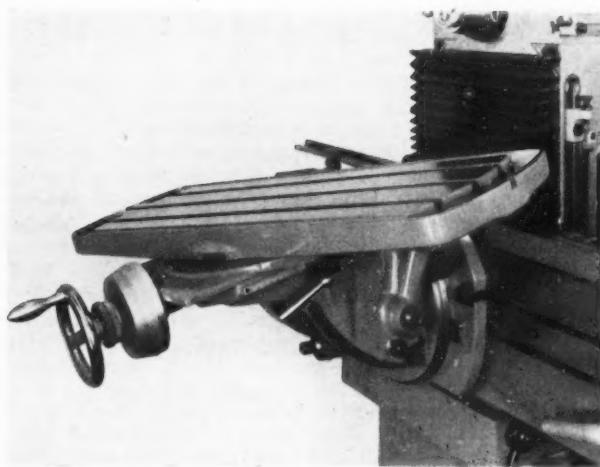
The New Universal Work Table for the Thiel Toolroom Milling Machine
